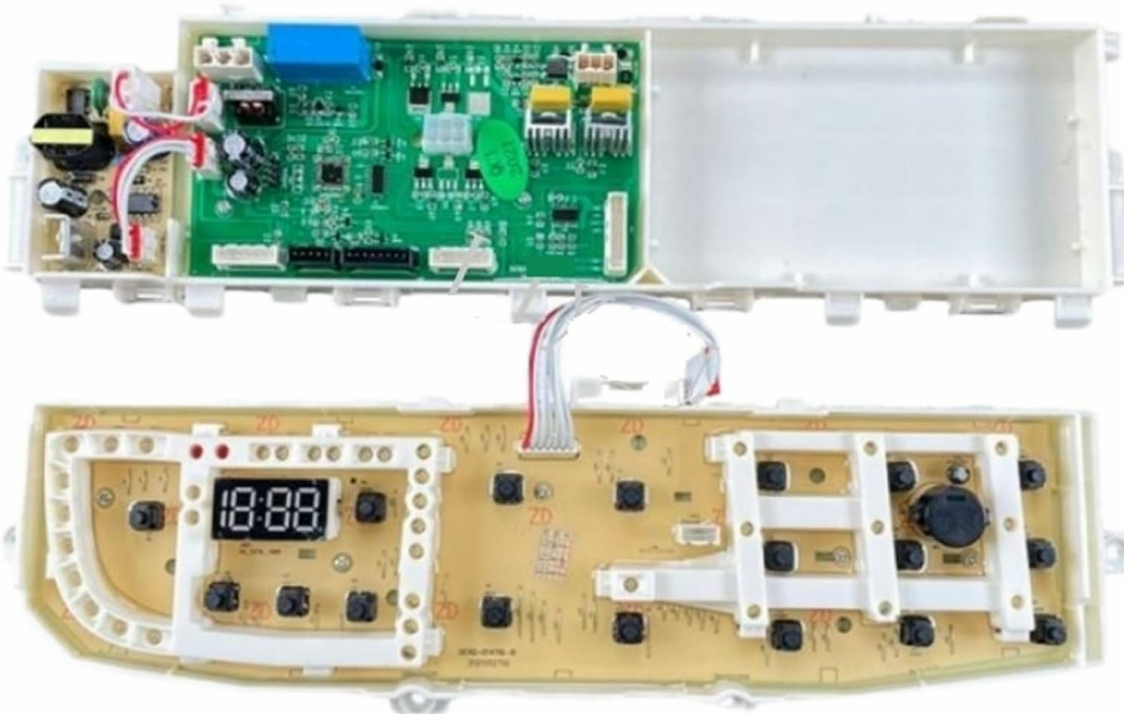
MiJob Washing Machine Computer Board. The top section shows the main circuit board with various electronic components and connectors. The bottom section reveals the user interface side, featuring a digital display (18:88) and several control buttons, indicating the front panel of the washing machine.
